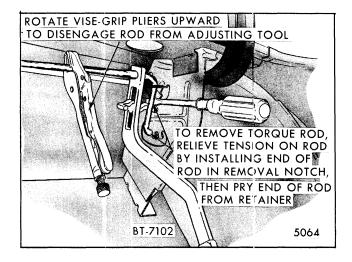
Rear Compartment Torque Rod Removal - Oldsmobile "E" Styles
